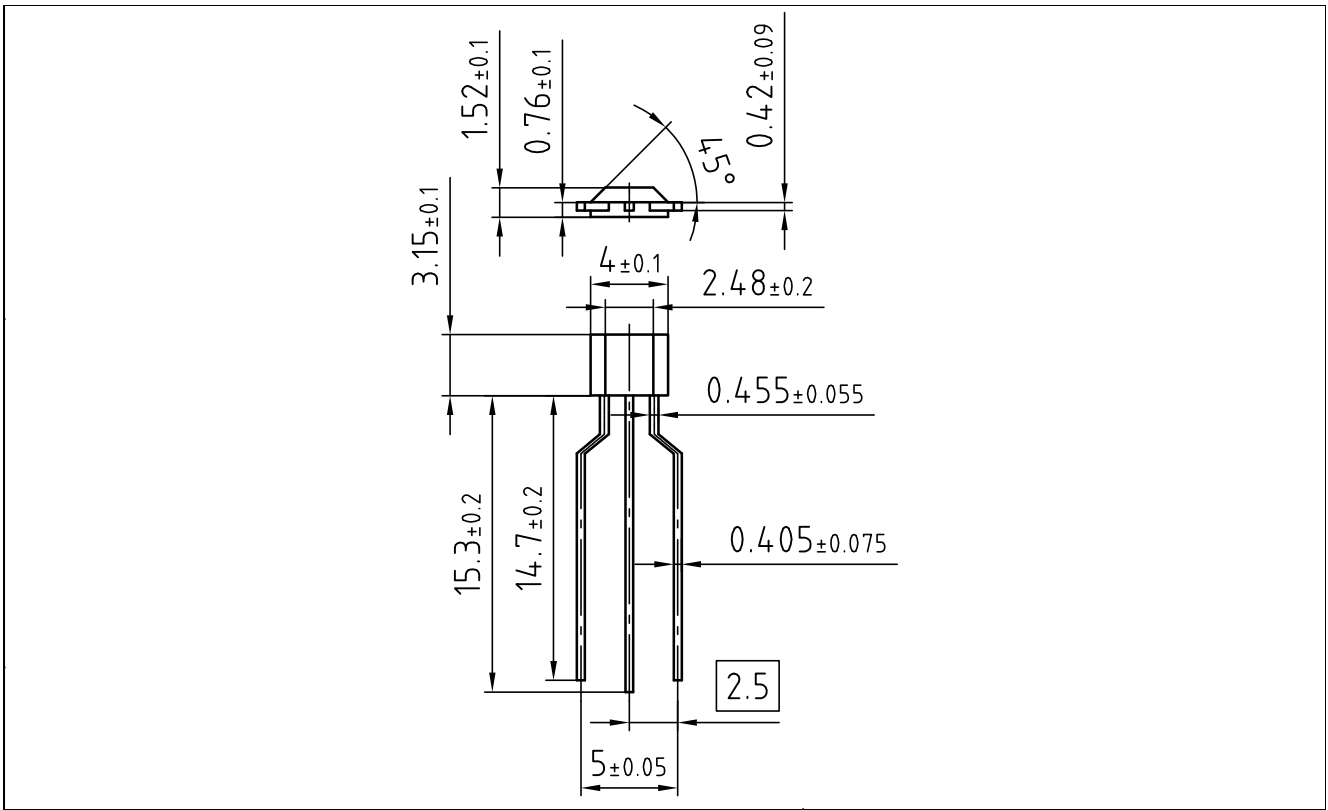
Package Outline TLV4968-1TB: TO92S-3-2 (All Dimensions in mm)
